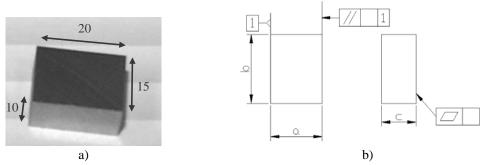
a) Parallelepiped benchmark b) Dimensional and geometrical tolerances analysed
